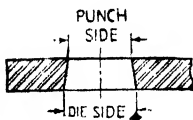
A punched hole is usually slightly larger on the die side because the die hole must be slightly larger than the punch to provide clearance.
